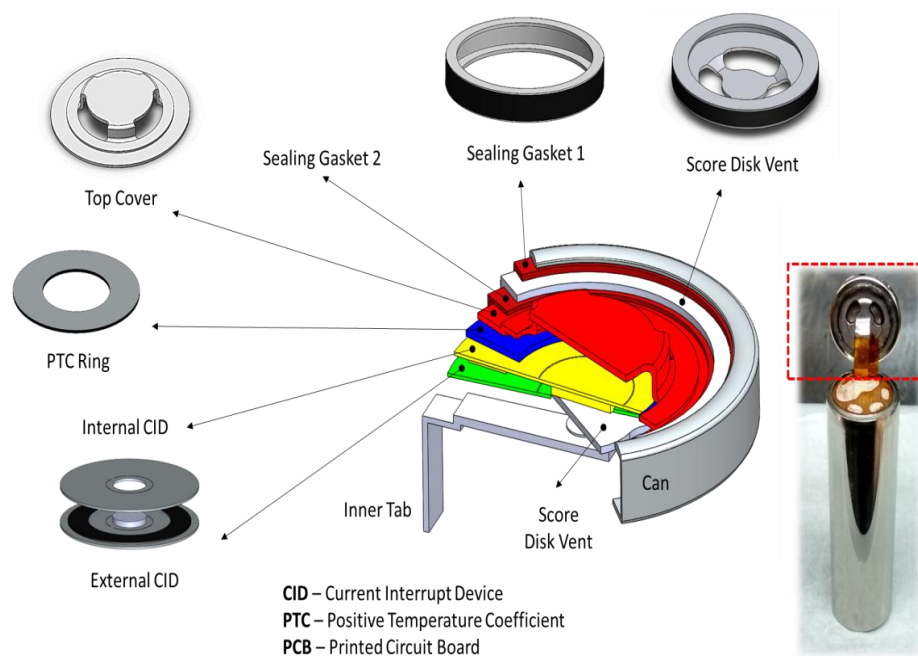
An exploded view of the cell header and its components. Several safety deatures installed in the cell are visible in this view.
